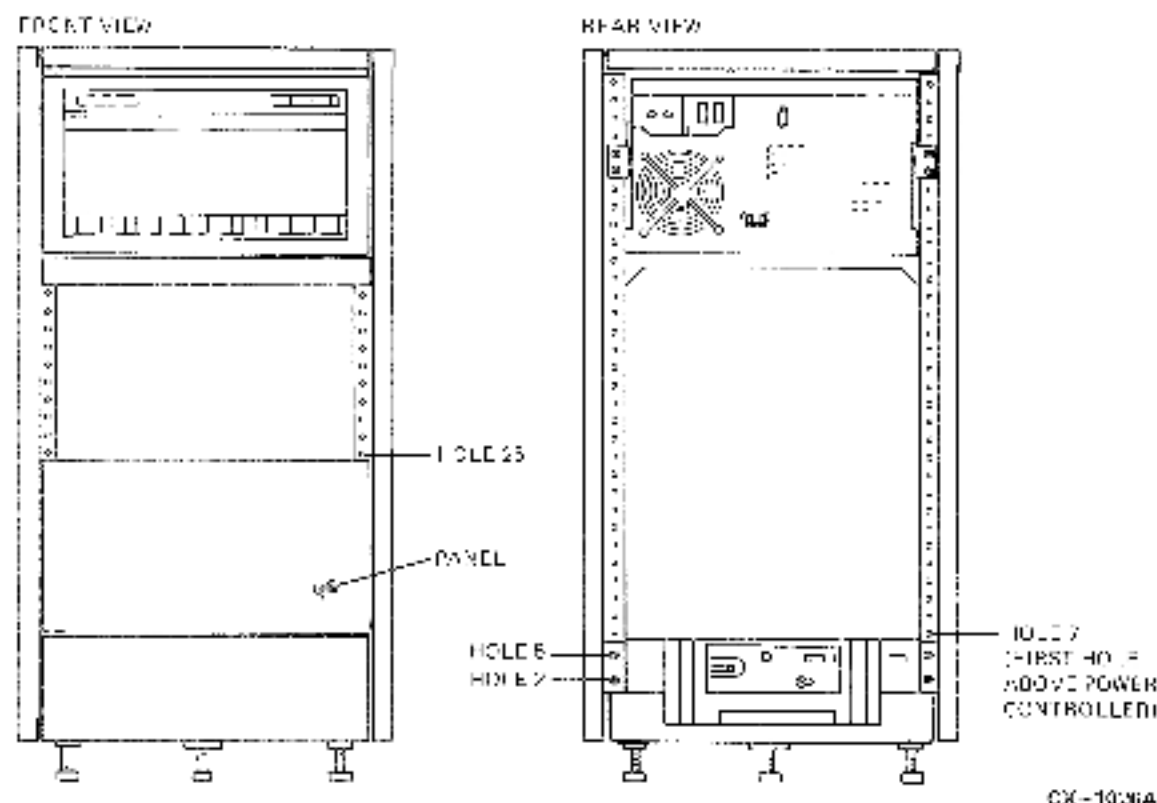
Cabinet Upright Holes (40-inch Cabinet)
